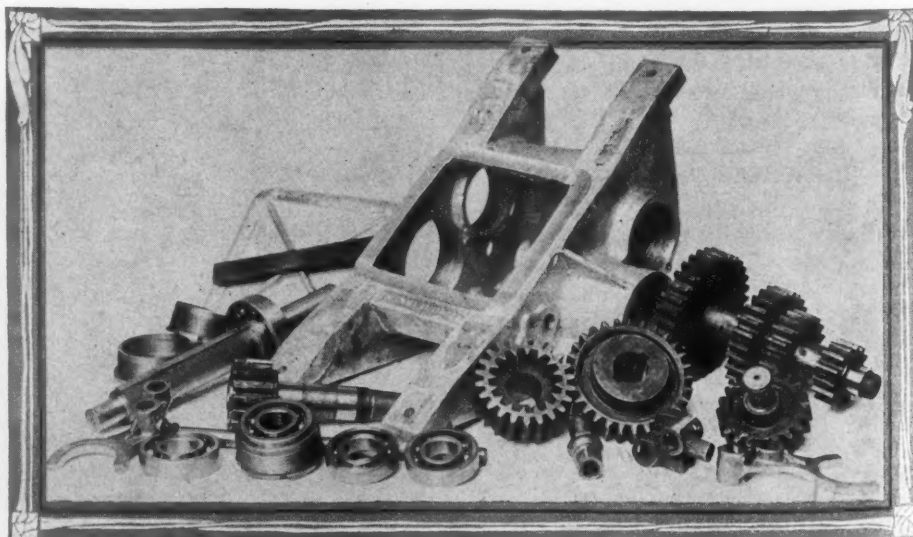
THE COMPACT GROUT GEARSET DIS-ASSEMBLED
